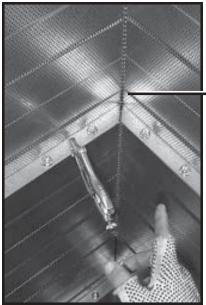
Checking for gaps in plenum top horizontal top seam.
